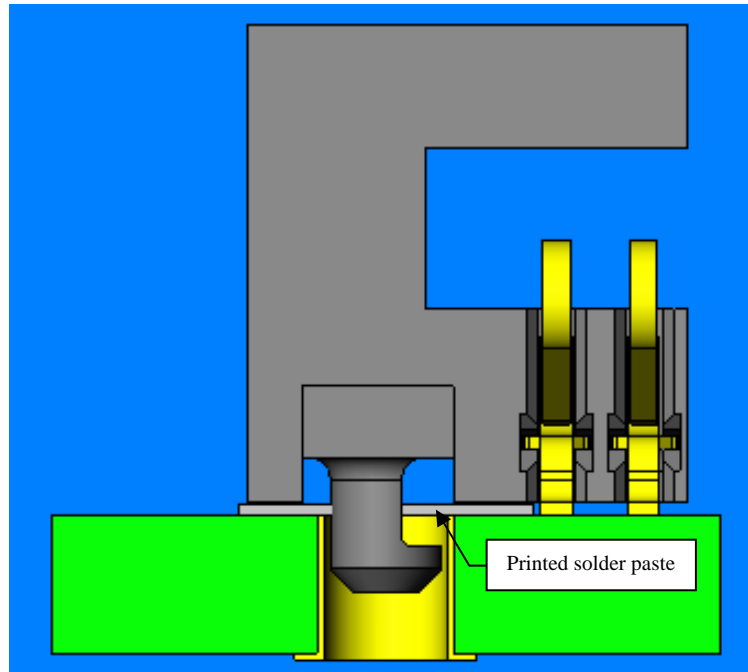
Typical Solder Lock geometry with printed solder paste over the plated through hole.
